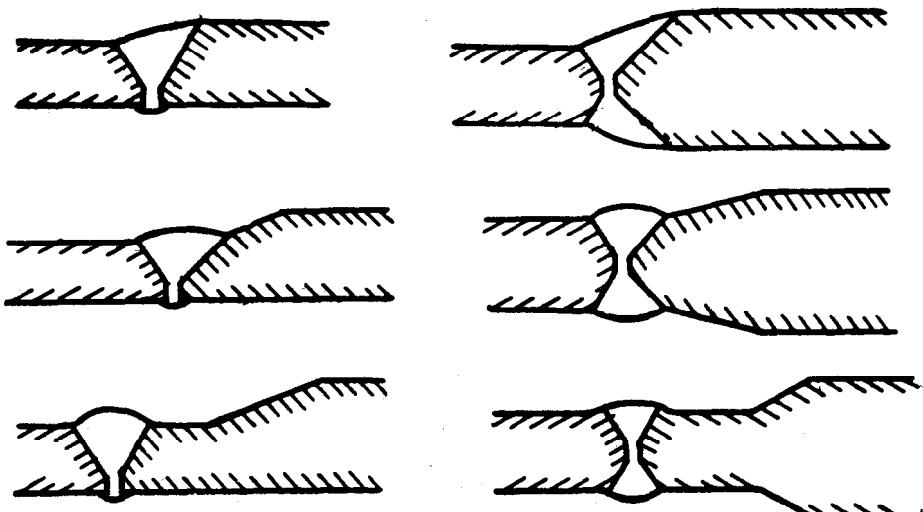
BUTT JOINTS OF UNEQUAL CROSS SECTION
